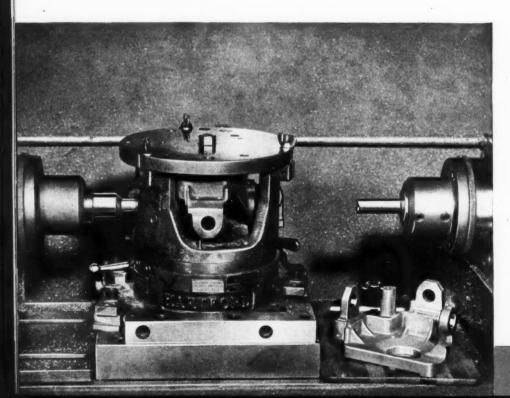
Boring Holes in "Gyro-Horizon" Frame to Close Tolerances. Opposite Holes Must be in Line within 0.0005 Inch, and Axis of Third Hole Must be Perpendicular to that of Other Two within 0.0005 Inch
